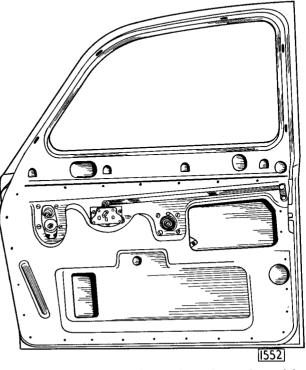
View of front door showing the window winding and door lock mechanisms.
